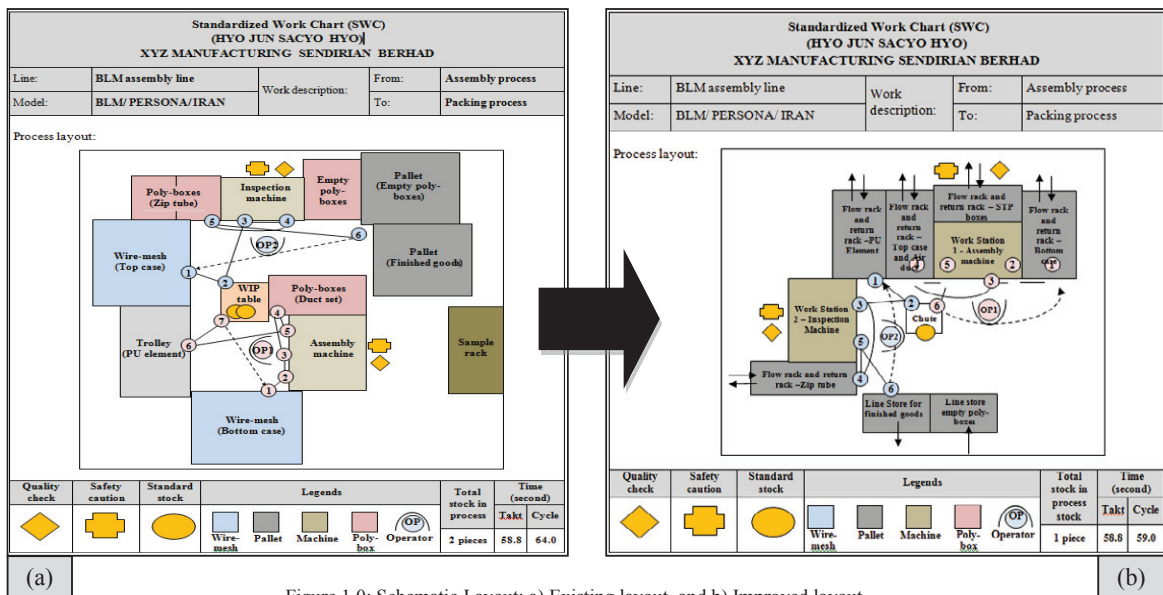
Schematic Layout: a) Existing layout, and b) Improved layout
